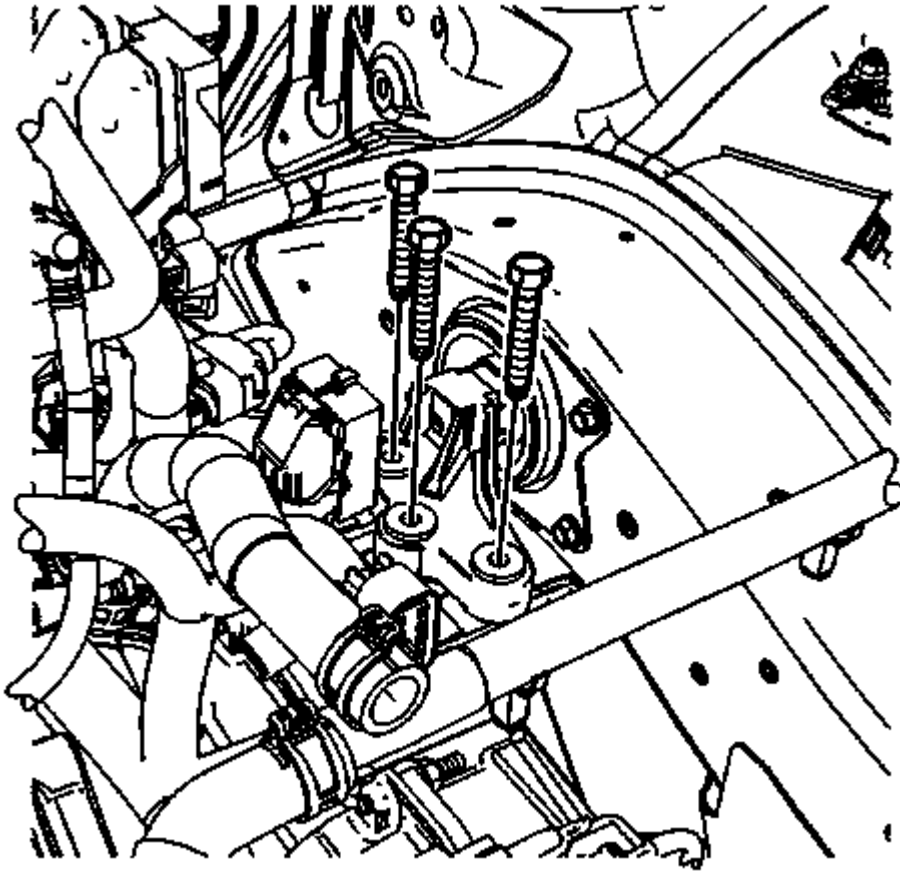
Transaxle Oil Cooler Line To Transaxle Nut
